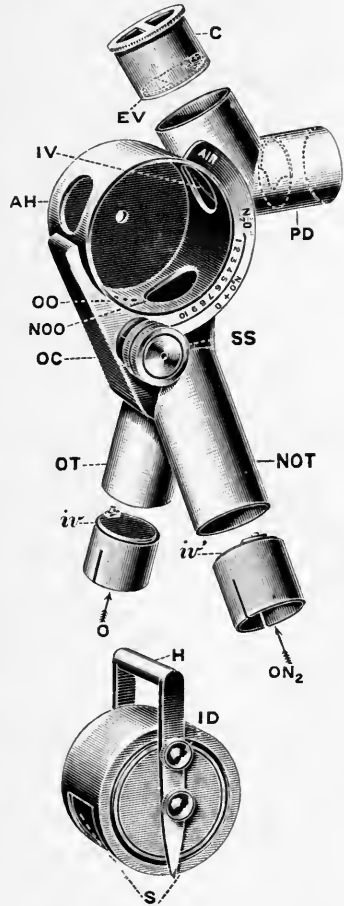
The Regulating Stopcock and Mixing-chamber shown in detail.
